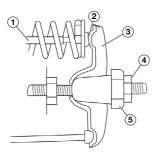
(1) Push Rod, (2) Feeler Gauge Area (3) Rocker Arm, (4) Jam Nut, (5) Adjusting Nut
